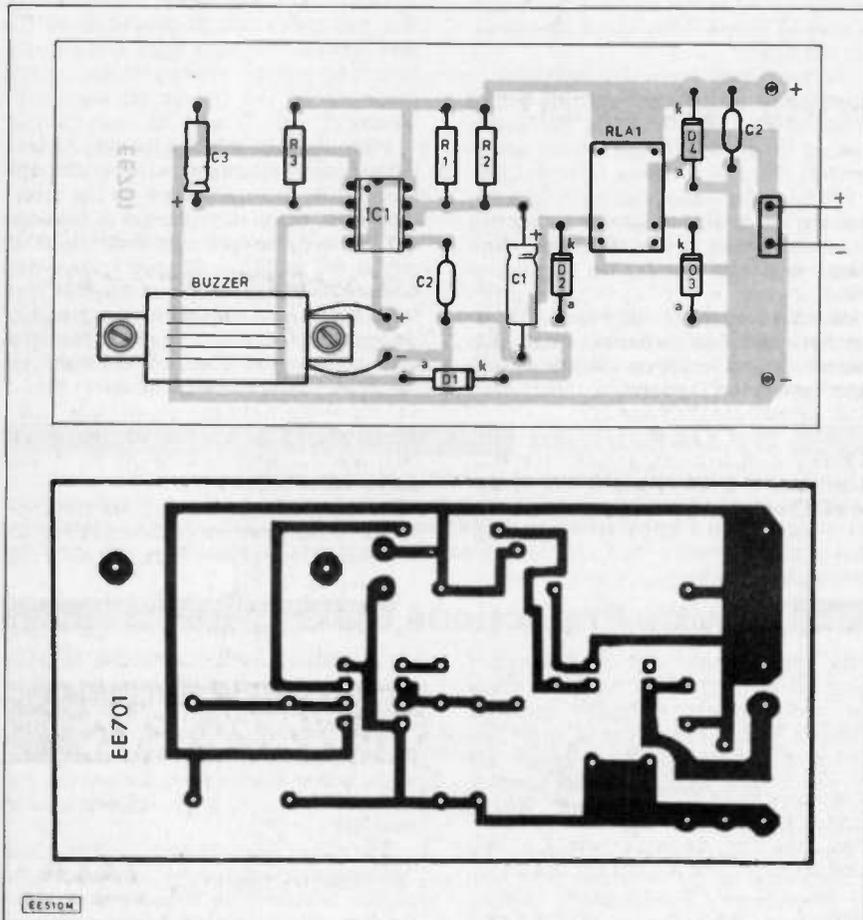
Printed circuit board component layout and full size copper foil master pattern. The completed circuit board showing the buzzer and relay can be seen below.
